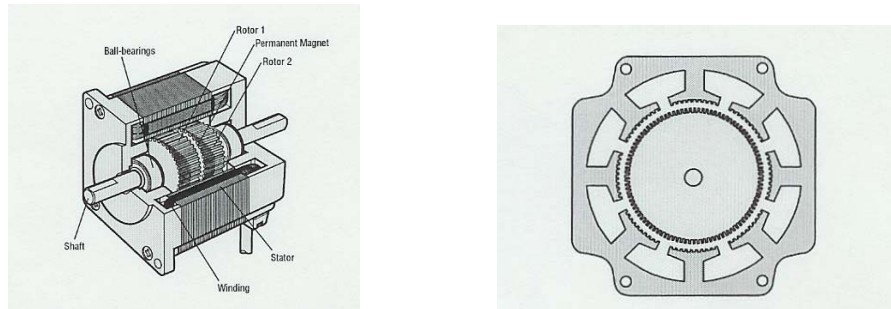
Structure of the 2-phase Stepping Motor (1.8 deg/step) and Cross section perpendicular to shaft [15]
